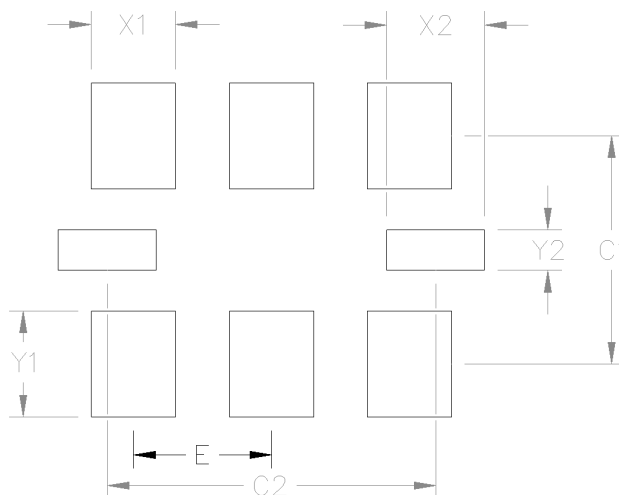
Si542 (5x7 mm) PCB Land Pattern
